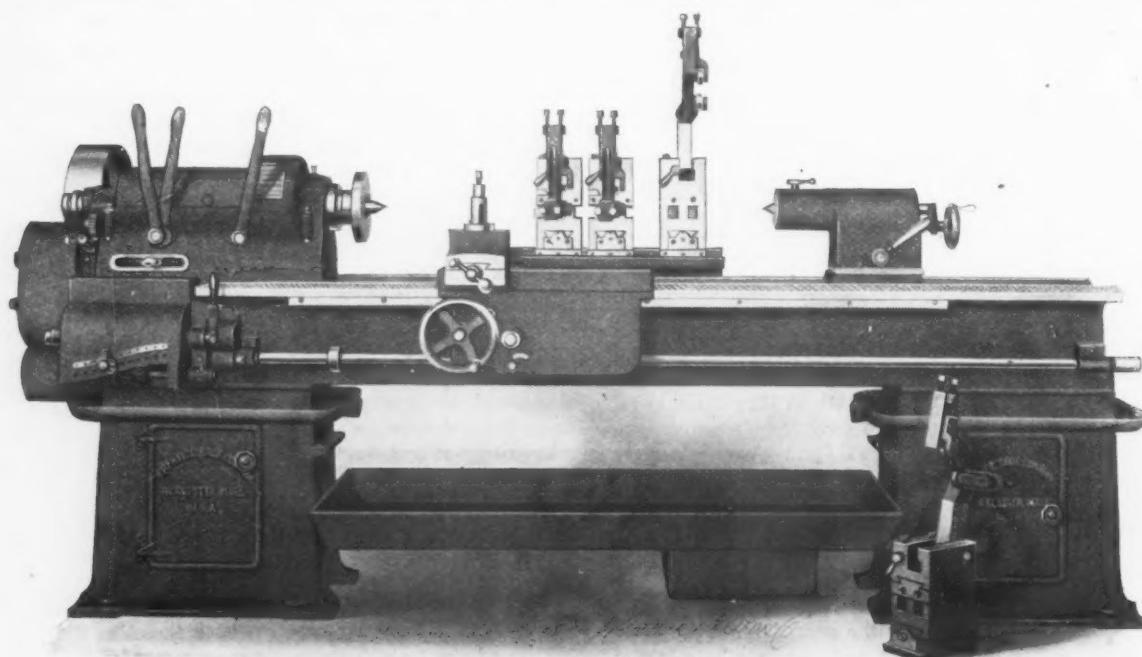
The 16-In. Shaft Turning Lathe Built by the Prentice Bros. Company, Hartford, Conn.
